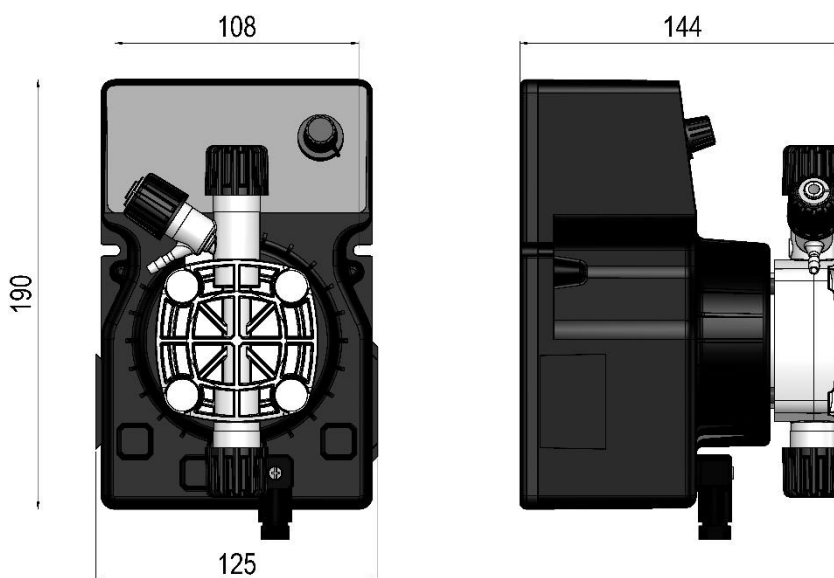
PMF pump, wall fixing (dimensions indicated in mm.).
